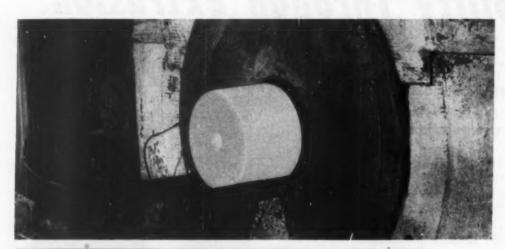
White-hot billet being inserted in the die container of the 5500-ton extrusion press for the first operation which forms the shank of the finished propeller blade
